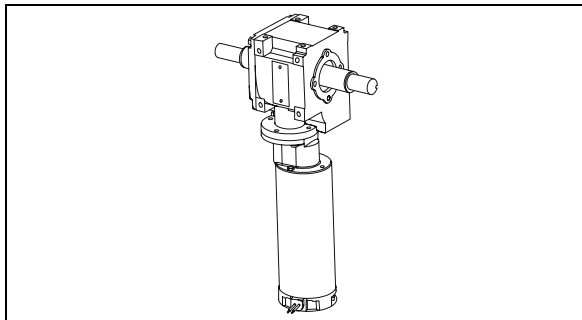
ELECTRIC MOTOR AND SPEED REDUCTION GEARBOX
